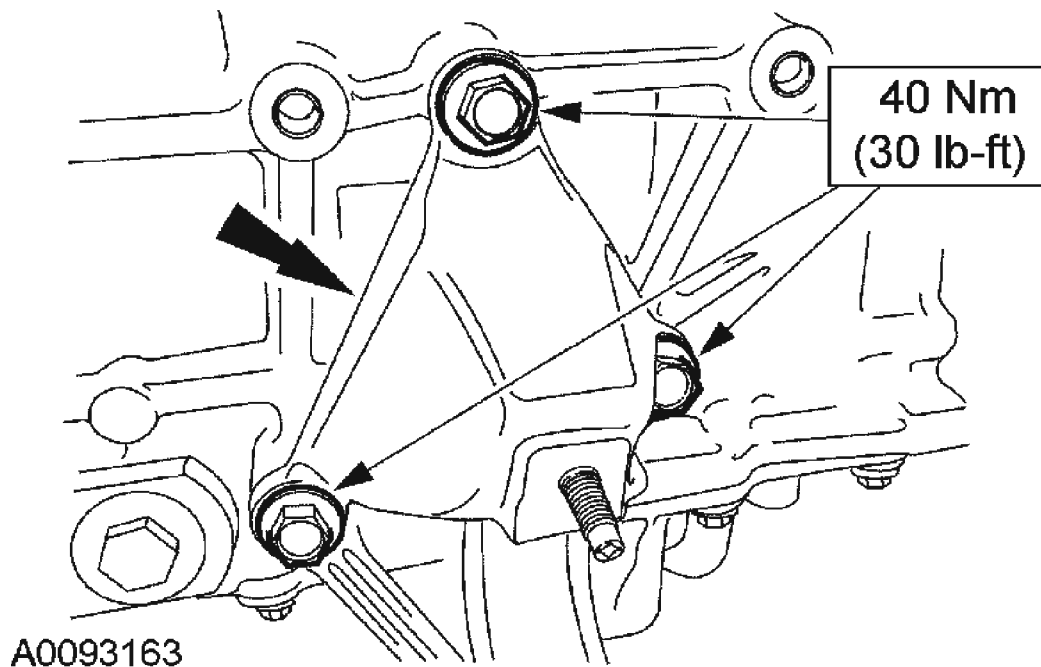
Installing Intermediate Shaft Bearing Bracket Bolts
